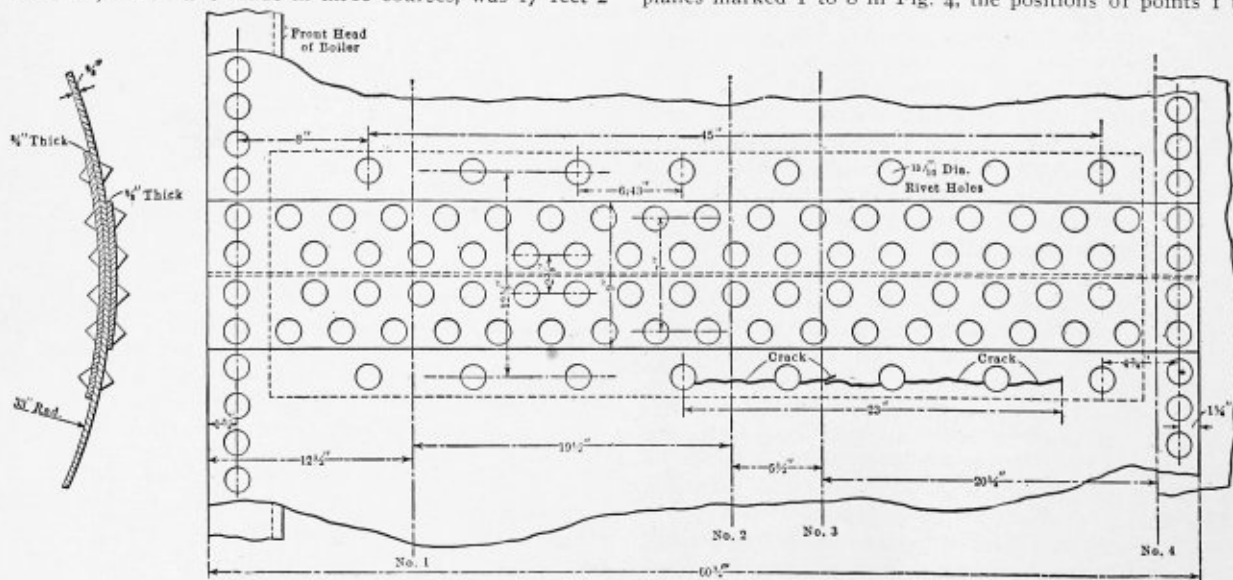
DETAILS OF THE TRIPLE-RIVETED BUTT-STRAP JOINT WHICH FAILED.
